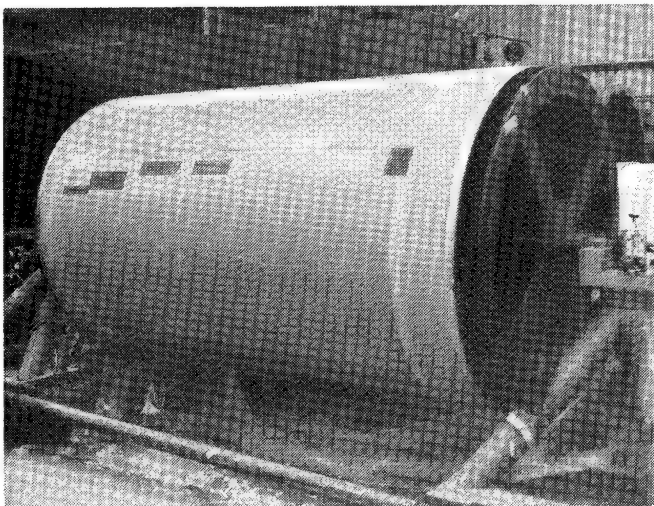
Adhesive-Filled Weld Lands
